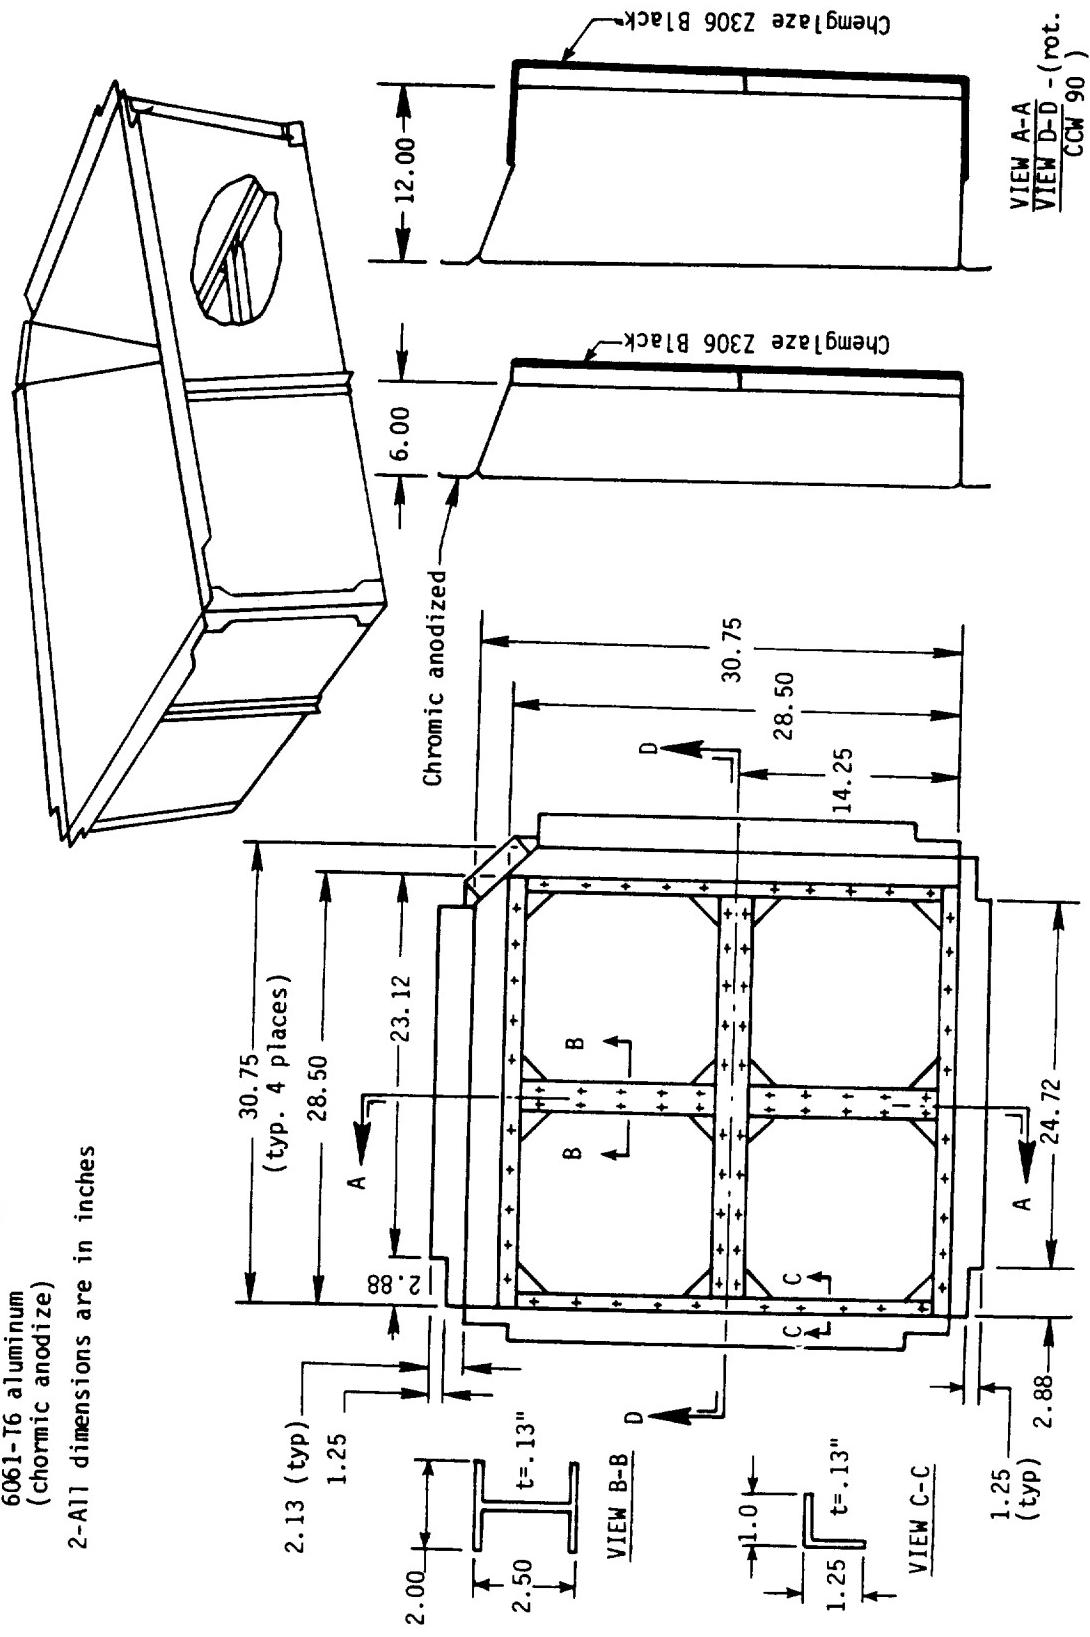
LDEF End "Corner" - Tray 6 & 12 Inch Deep
